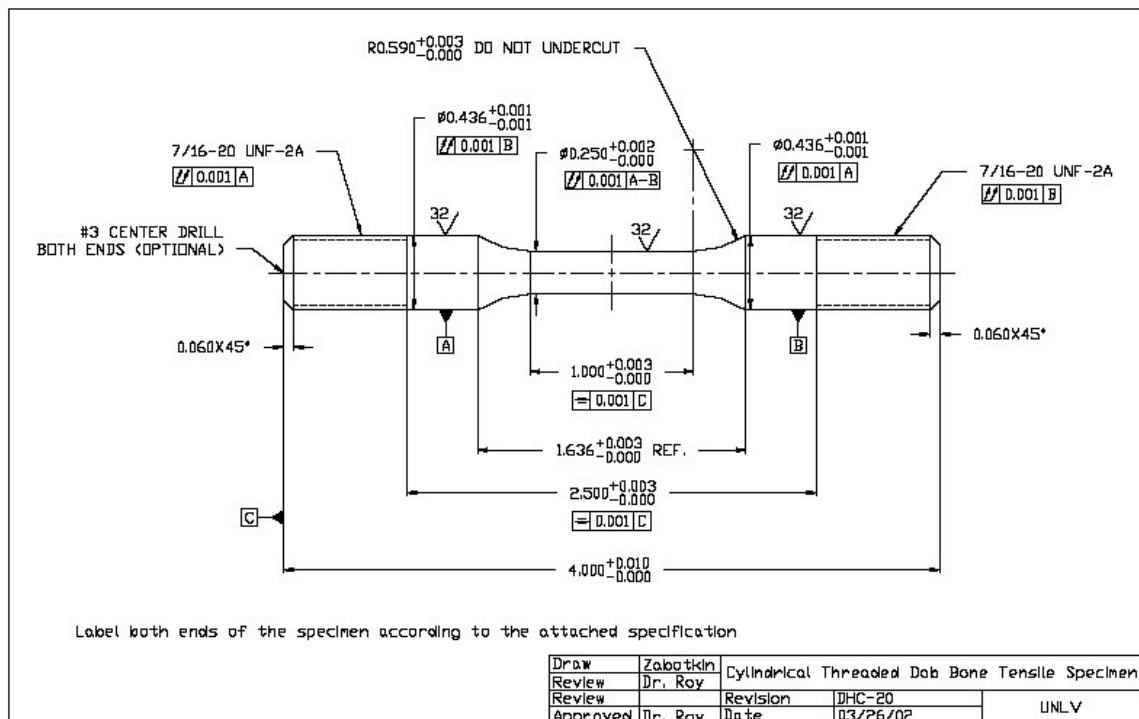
Dimensions of Smooth Cylindrical Specimen
